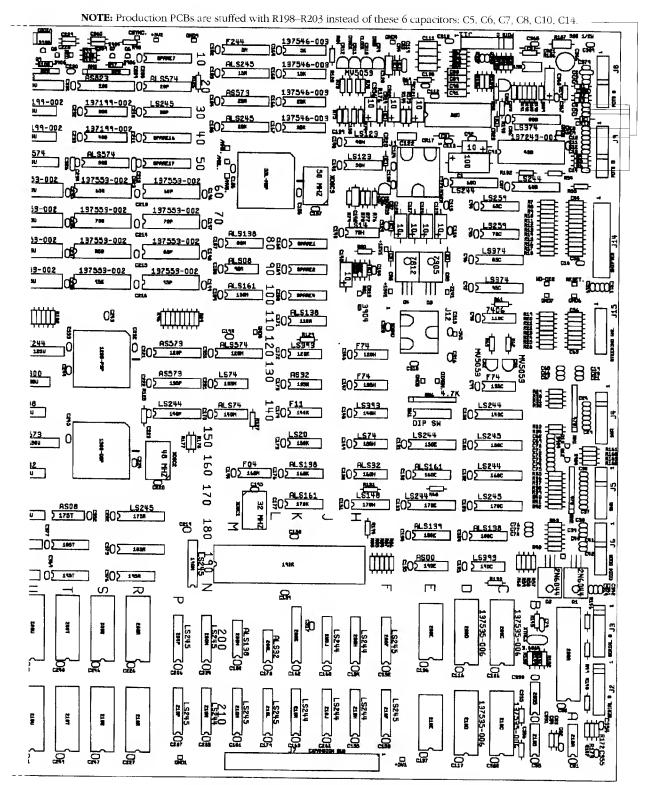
Multisync PCB Assembly, Continued A044998-03 B
